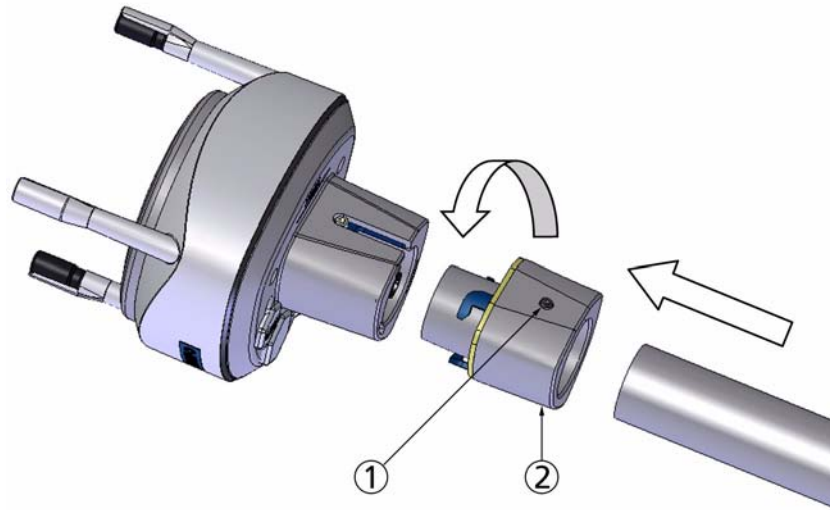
Mounting WMT50 to Pole Mast Using Optional Mounting Kit
